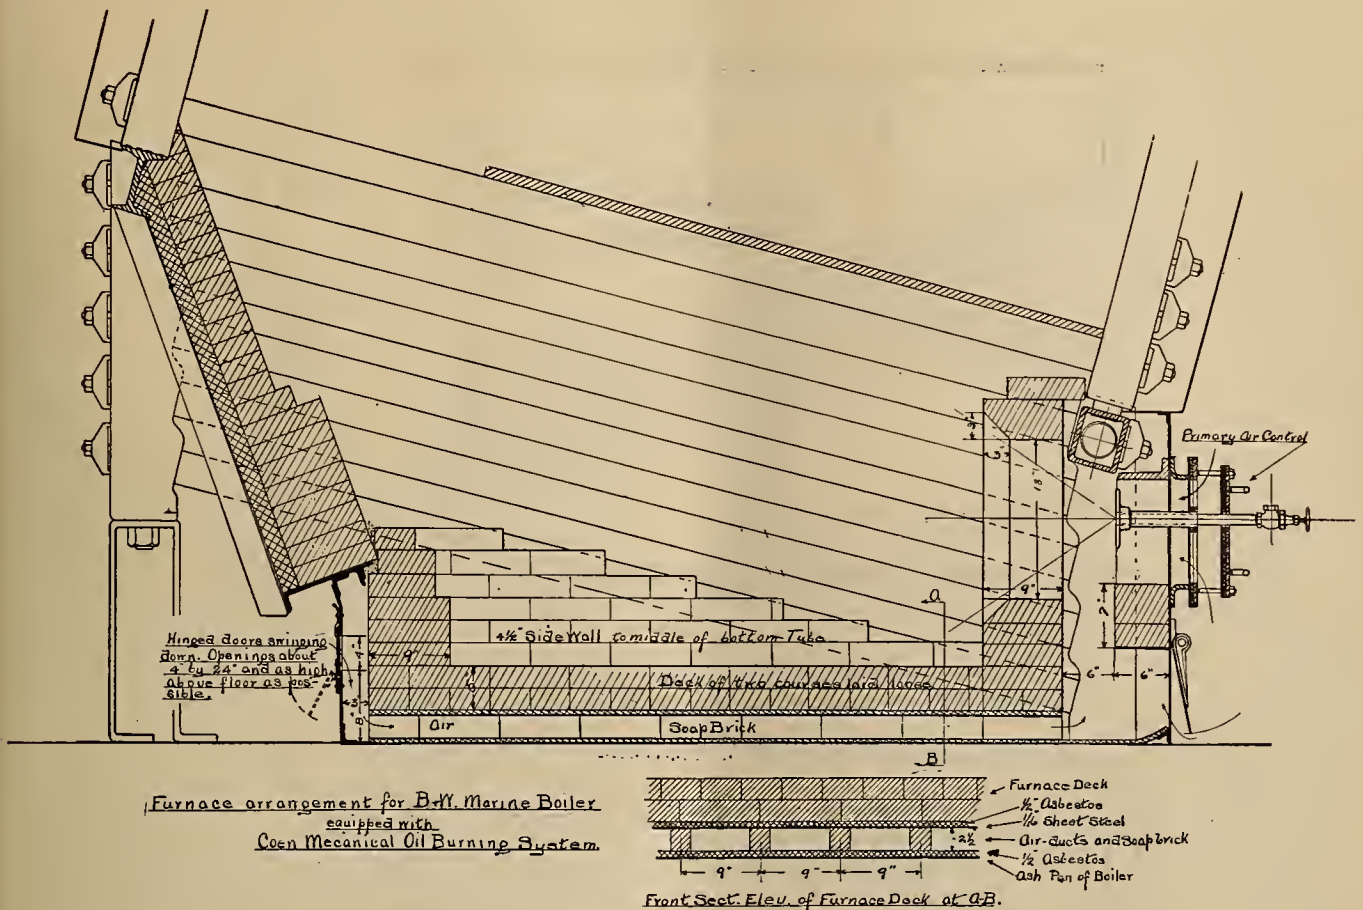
Furnace Arrangement Under B. &amp; W. Boiler.
